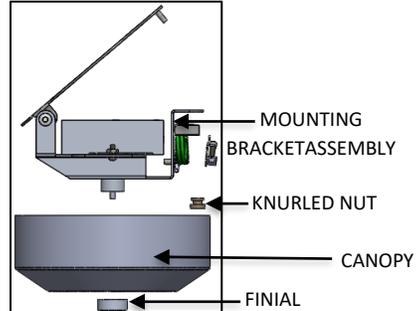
MOUNTING PLATE DIS-ASSEMBLY
